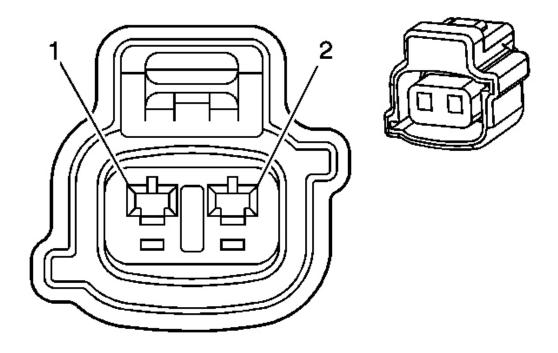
Door Lock Actuator Connector End Views Courtesy of GENERAL MOTORS CORP.
